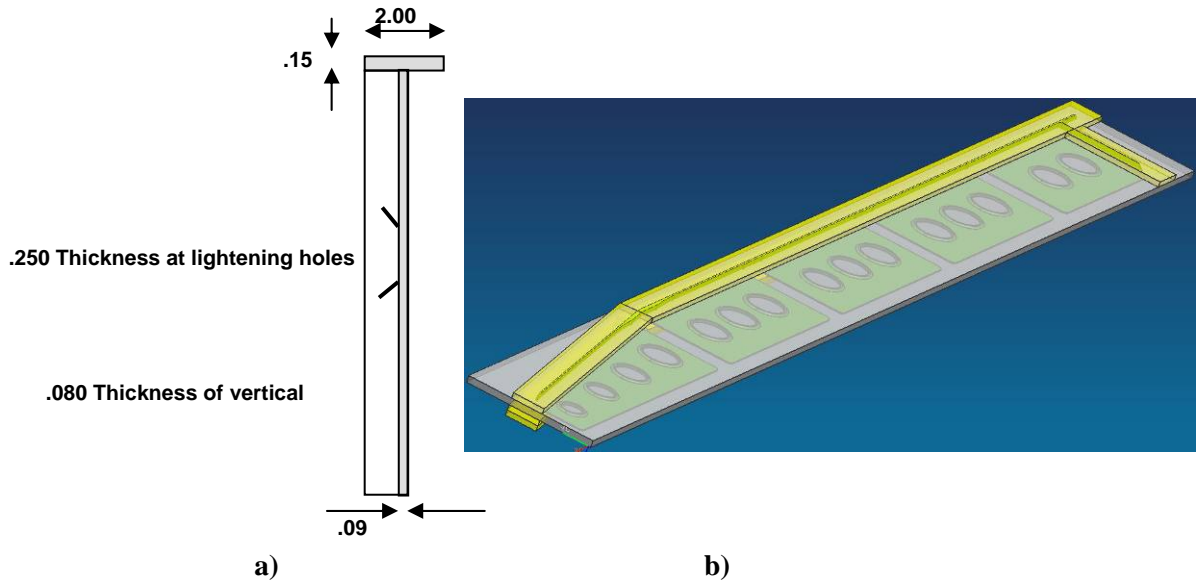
a) Cross-Section of the 777 Floor Article Showing Pertinent Dimensions and b) A Top View Showing the Plates that will be Welded onto the Top Surface.
